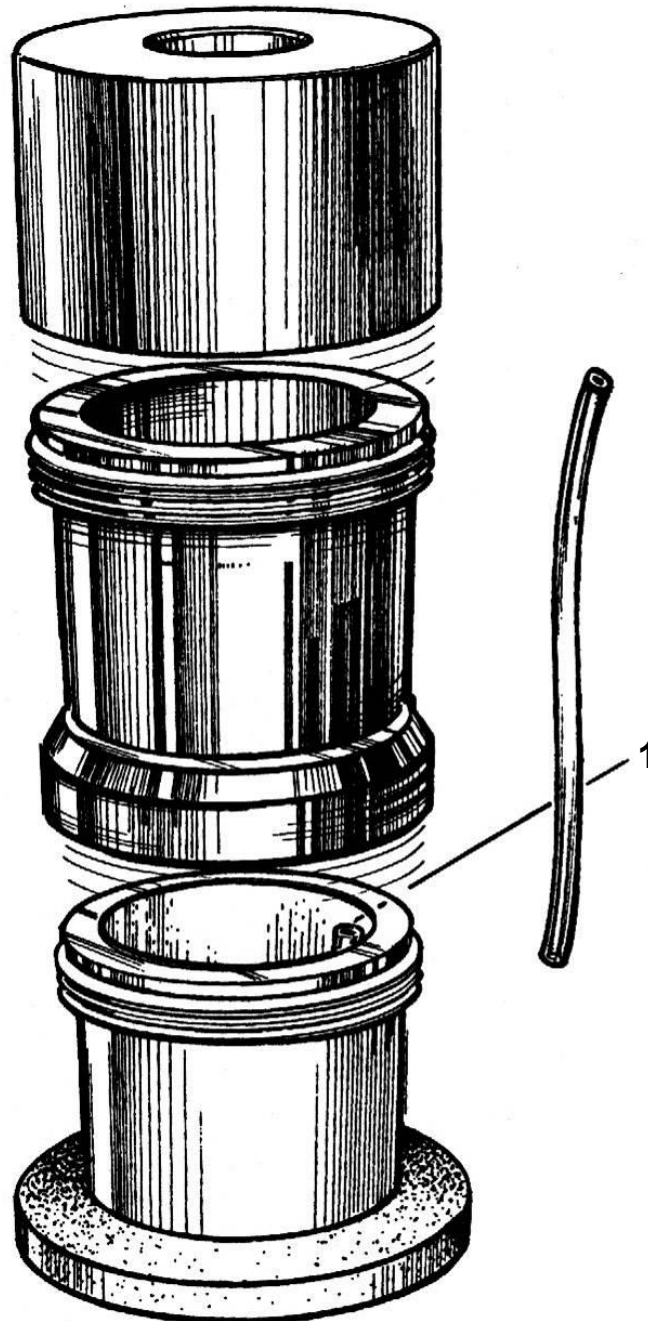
P/N MB1198-9^[1] (-10) AIR VALVE ASSEMBLY
